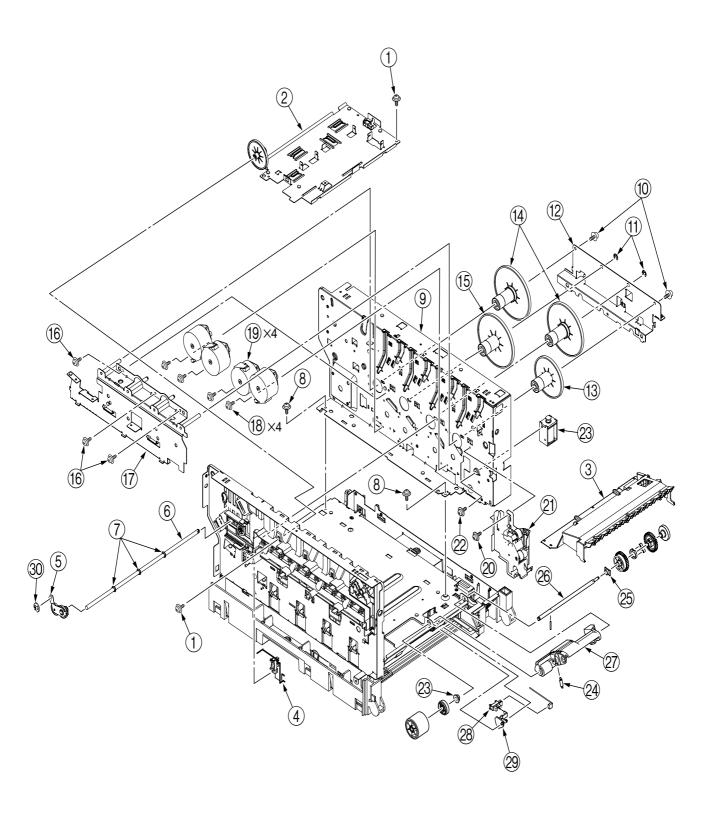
Main Motors / Solenoid / Paper-End Sensor
